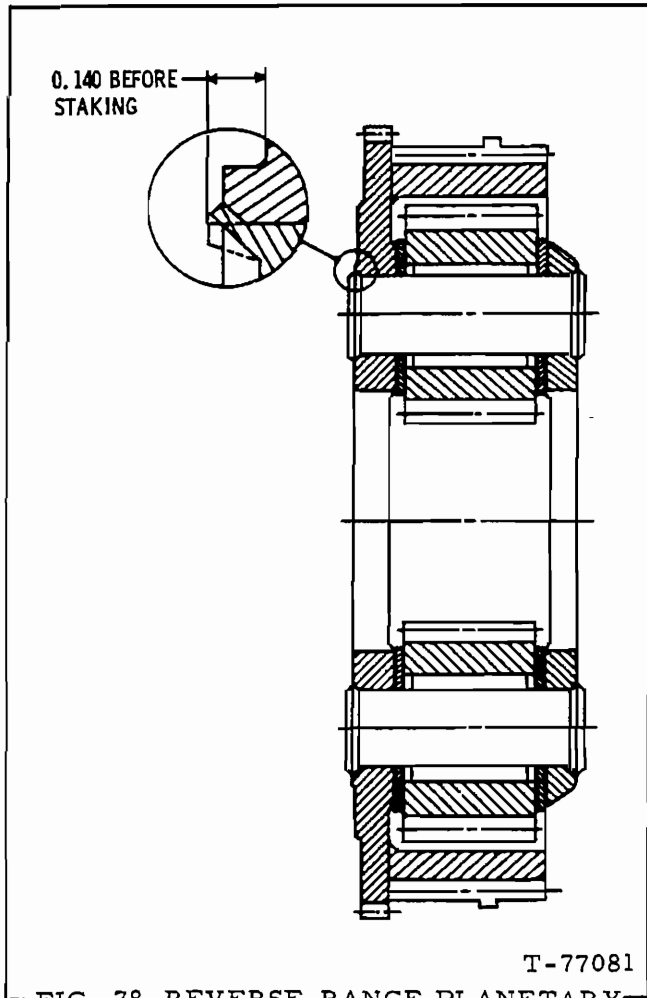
REVERSE-RANGE PLANETARY CARRIER ASSEMBLY - CROSS-SECTION VIEW
